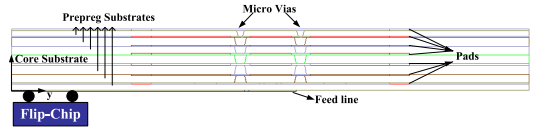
Schematic of an advanced multilayer PCB technology connected to the MMIC for system-level assembly by solder bump flip-chip technology.
